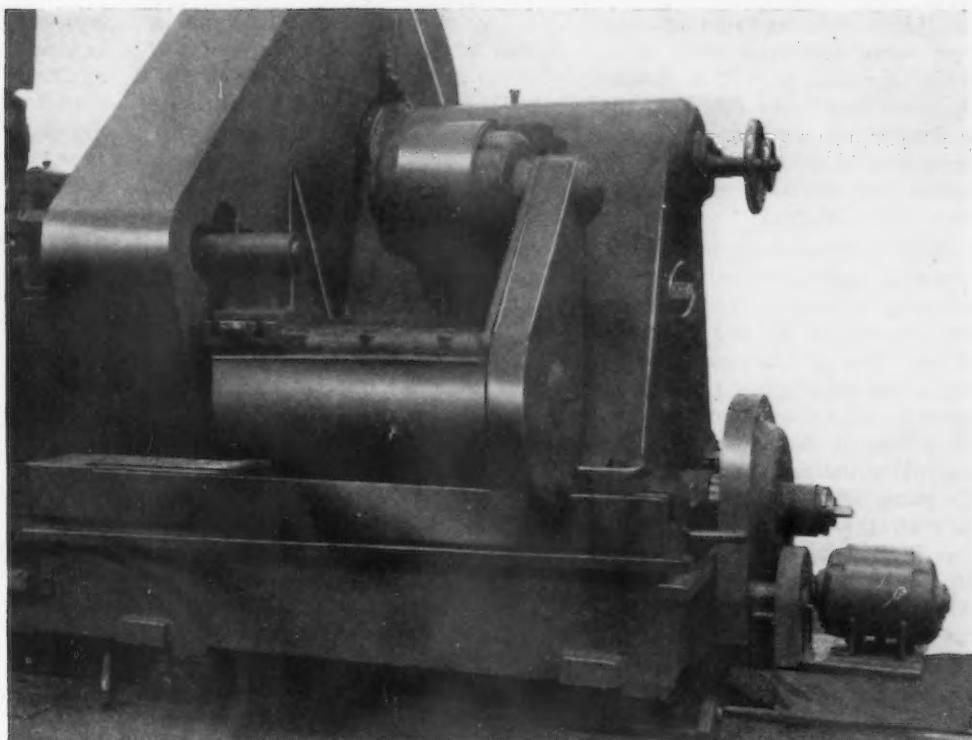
Rear view of grinding heads showing them fastened closely together for grinding long journals.
